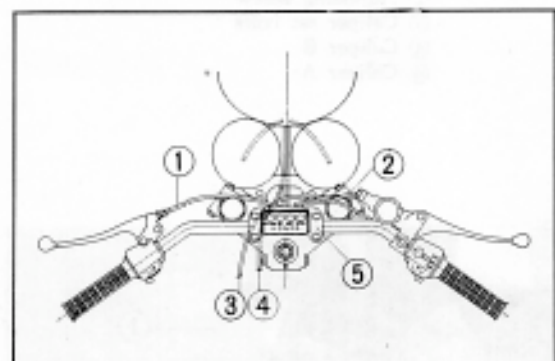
① Clutch cable ② Front brake hose ③ Throttle cable ④ Wire harness ⑤ Fork top bridge
